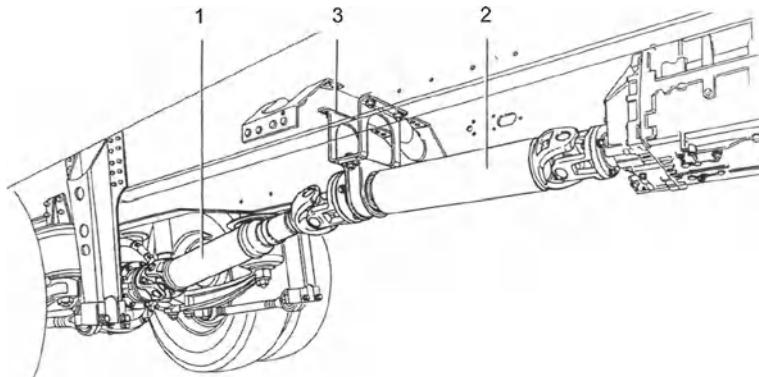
Two-pieces propeller shaft for the rigid rear axle of a heavy duty industrial vehicle (courtesy of Iveco)
